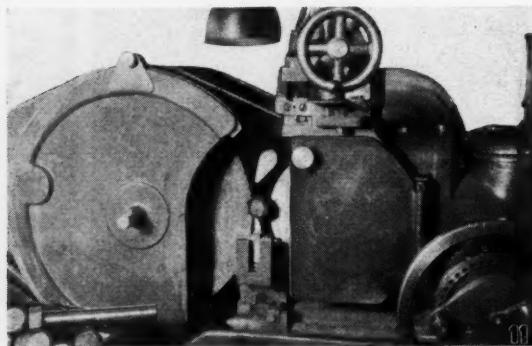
Grinding a standard locomotive taper bolt in the centerless grinder. Fig. 12—Using a home-made device to grind-in throttle valves to the ring-seats.
